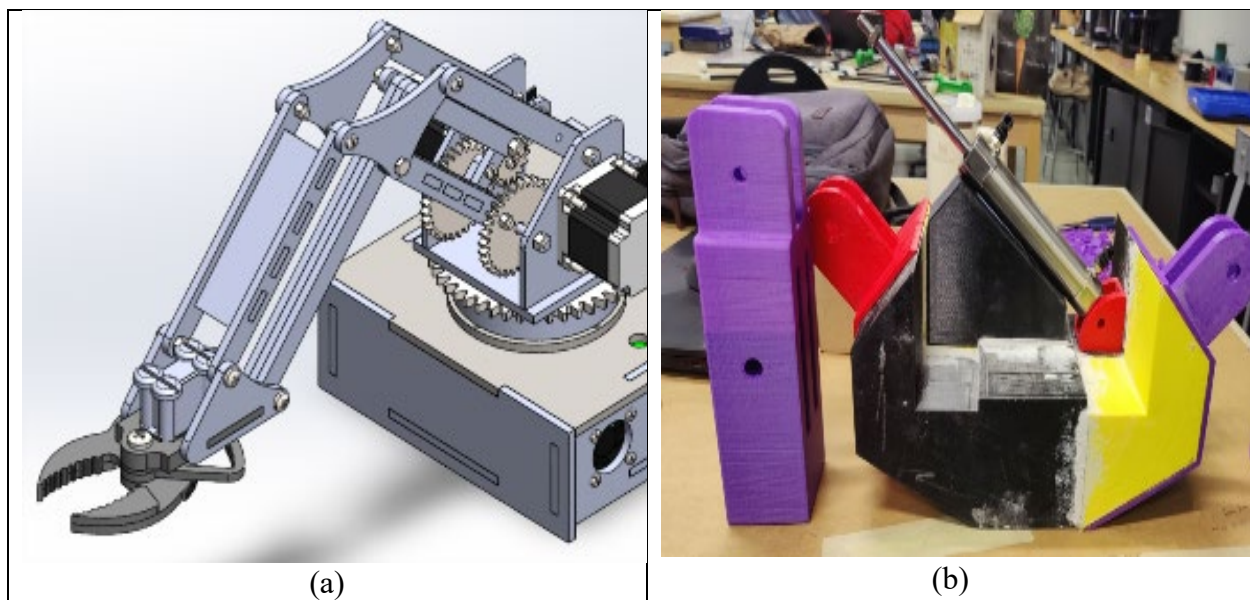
(a) TCTR design for a Robotic Arm, capable of moving in all 3 axes, (b) 3D-printed parts that have yet to be assembled
